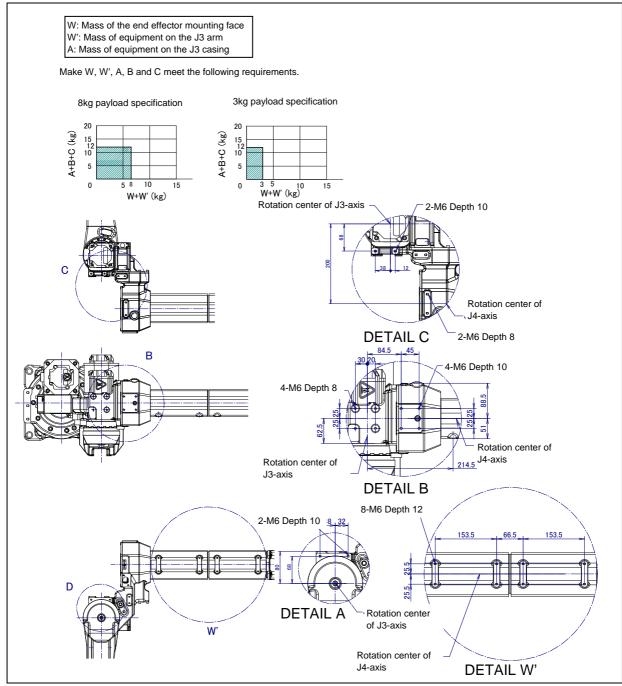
(d) Equipment mounting faces (ARC Mate 100iC/8L, M-10iA/8L)
